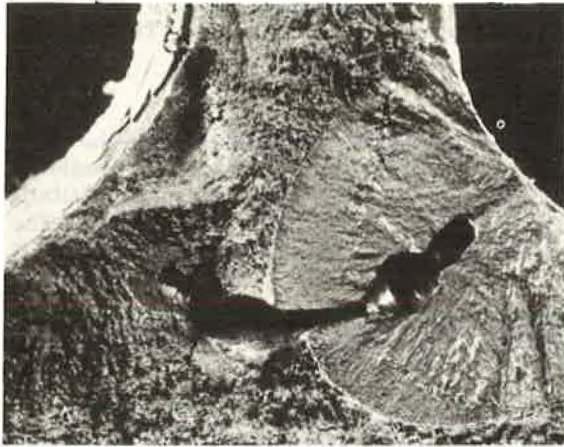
Small crack with penetration to the fillet weld surface (~x6.3).
